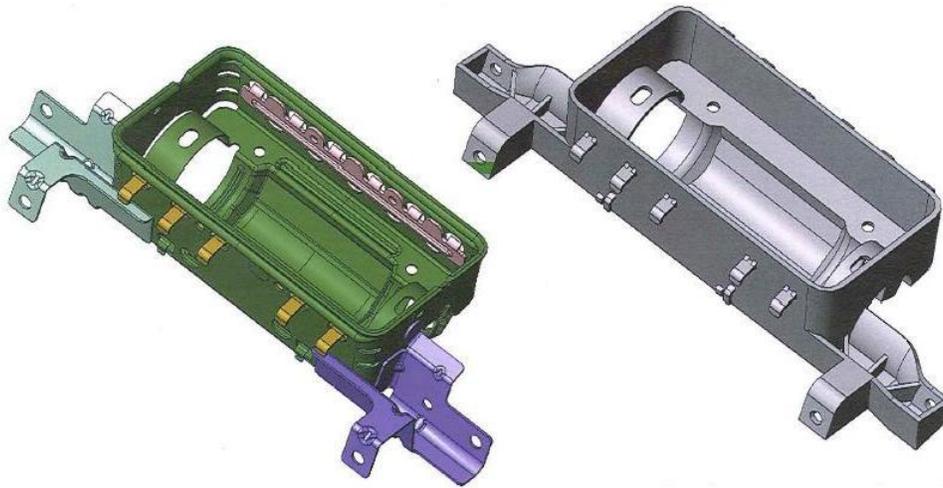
Passenger Side Airbag Housings, Fabricated Steel Assembly (left) and Injection Molded Plastic Component (right)
